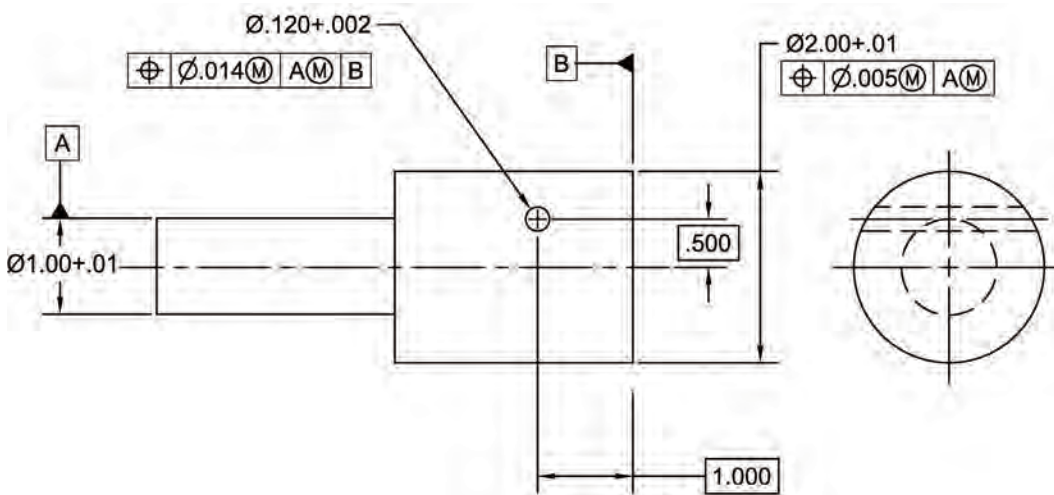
“NEW” Drawing with GD&T.
